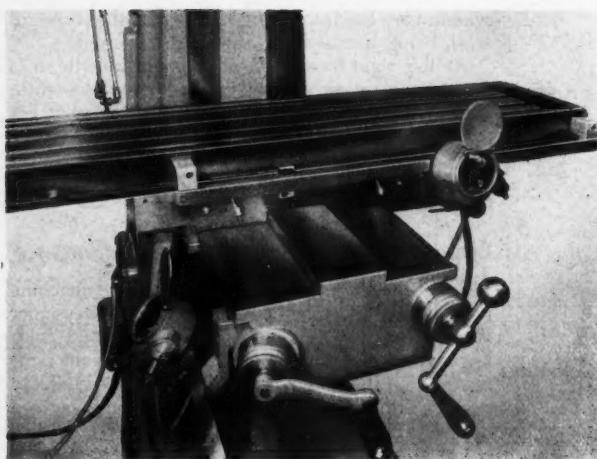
Close-up view of the Beaver type VRBP vertical milling machine fitted with optical measuring equipment which provides for accurate setting of the machine table
